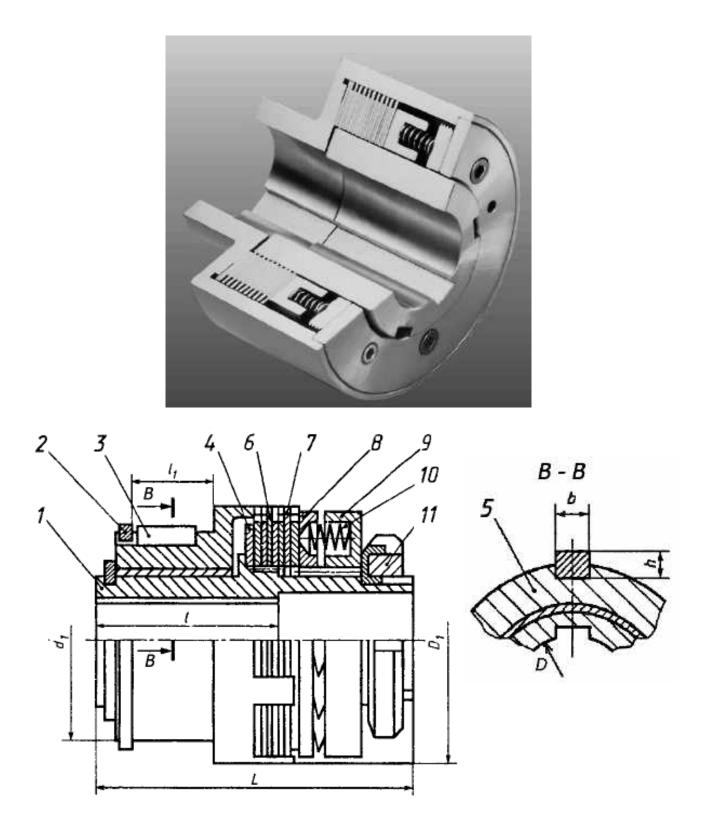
Safety multiple-disc slipping clutch (GOST 15622-96): 1 – driving hub; 2 – ring; 3 – press plate; 4 – spring frame; 5 – driven hub; 6 – driving plate; 7 – driven plate; 8 – spring; 9, 10 – nut and stopper; 11 – split ring; 12 – key
